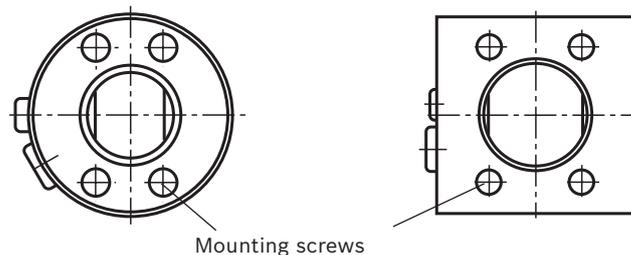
Mounting bores: left-hand side (round) for NG 18, 28, 25; right-hand side (rectangular) for NG 71, 100, 140
